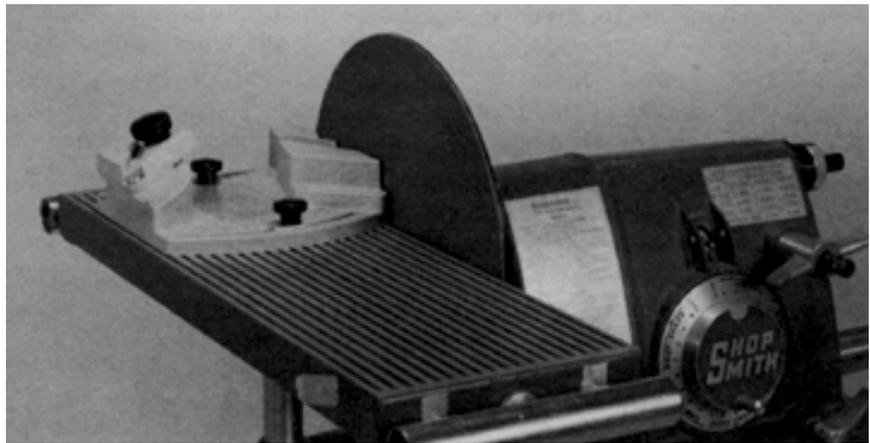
To sharpen lathe chisels, mount the sharpening guide on the extension table only.
